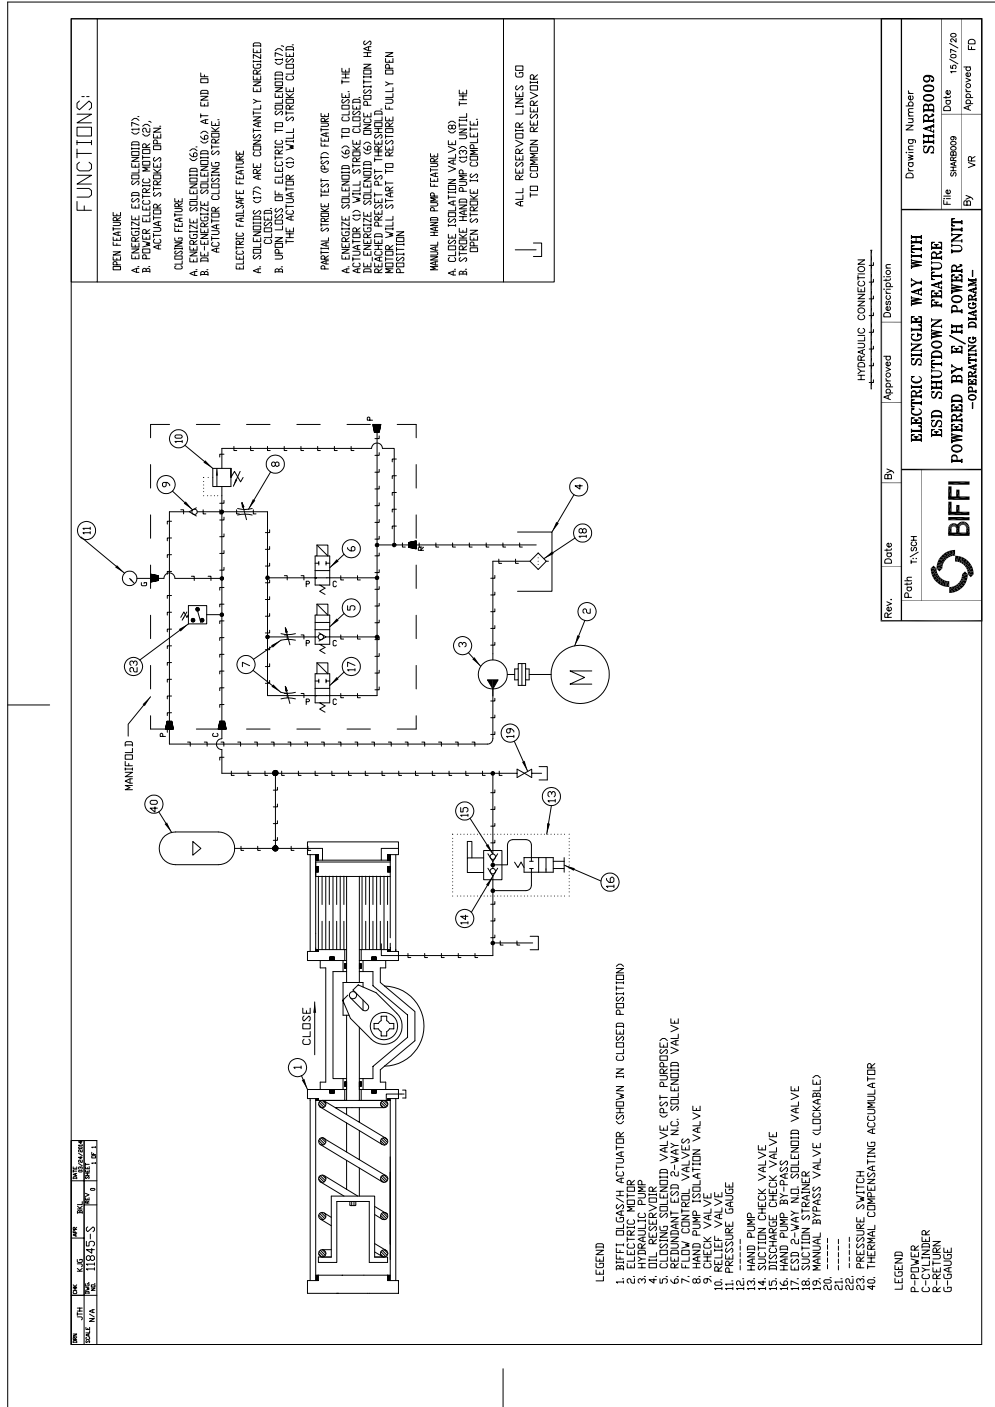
General Arrangement Hydraulic Schematic Drawing (SHARB010)
